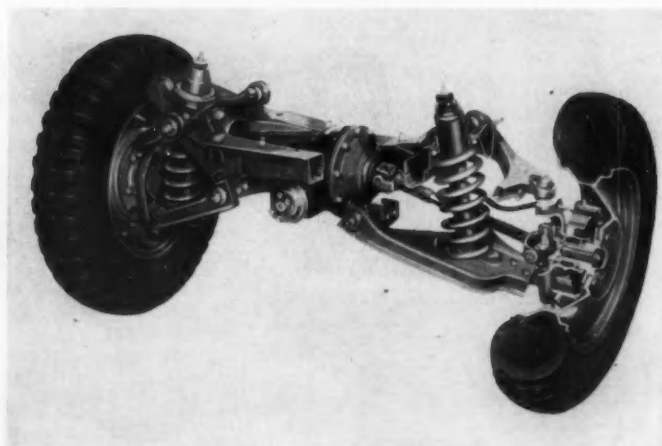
Swung-arm-type rear suspension of the M151. A variable rate coil spring forward of the wheel drive shaft is mounted between the arm spring seat and the body.
